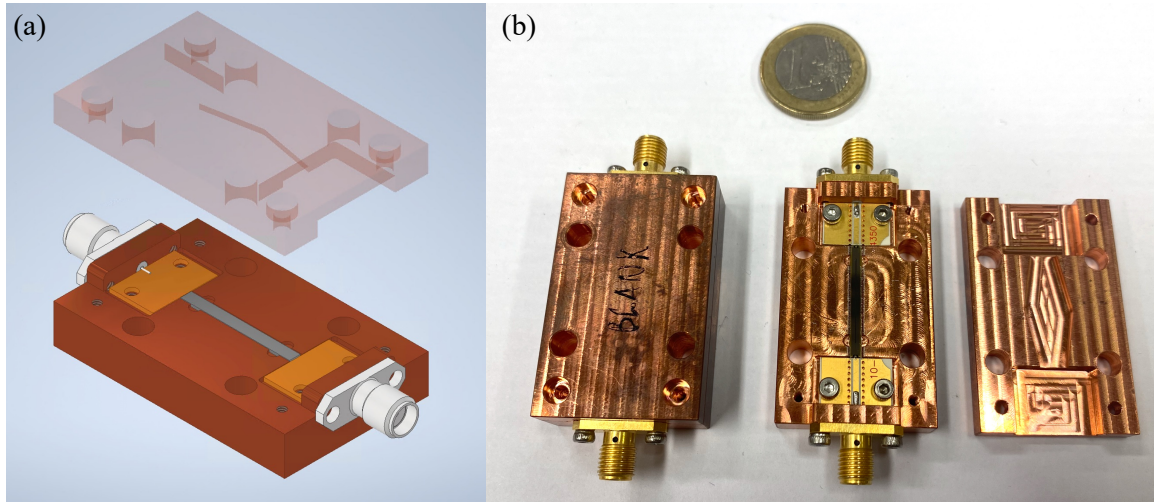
(a) CAD model of sample-holder B assembly. (b) Fabricated sample-holder B assembly with a JTWPA chip installed.
